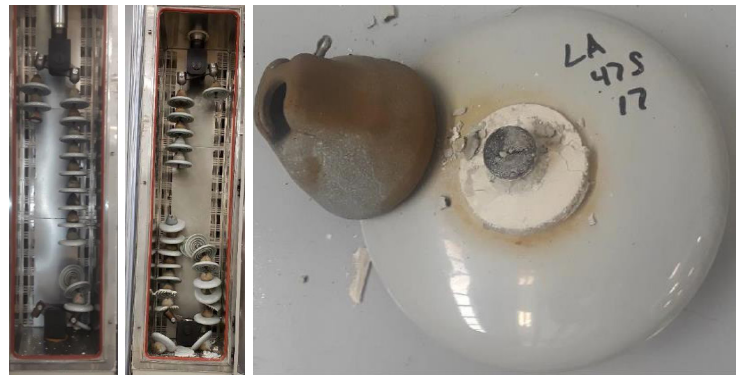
String separation during a thermo mechanical test performed on weak porcelain units containing already cracks from years of aging
